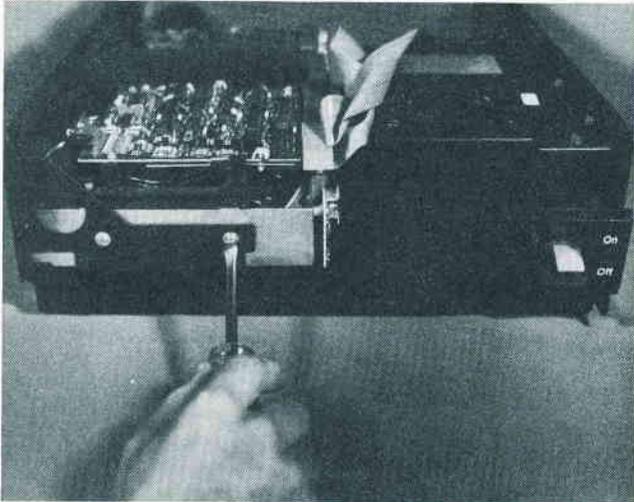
Remove the two silver-colored flat-head screws holding the disk drive to the chassis.
